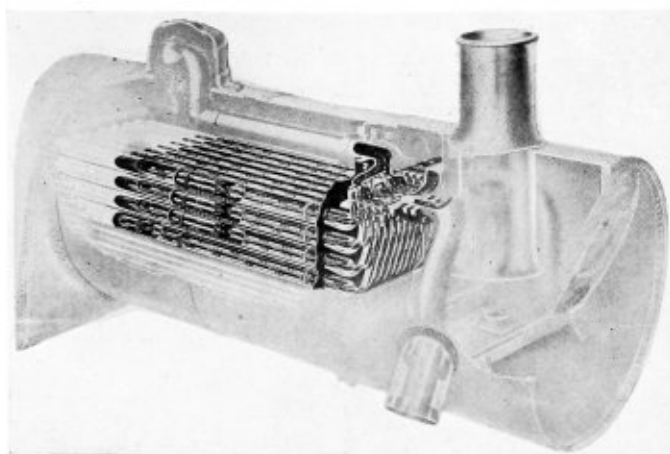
Type "A" Top Header Fire Tube Superheater
